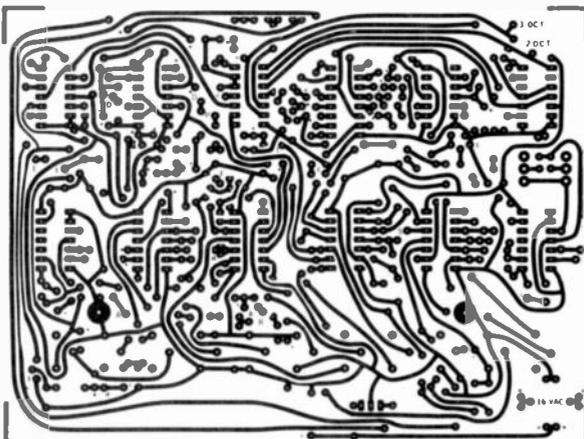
FOIL PATTERN of single-sided PC board shown half-size.
